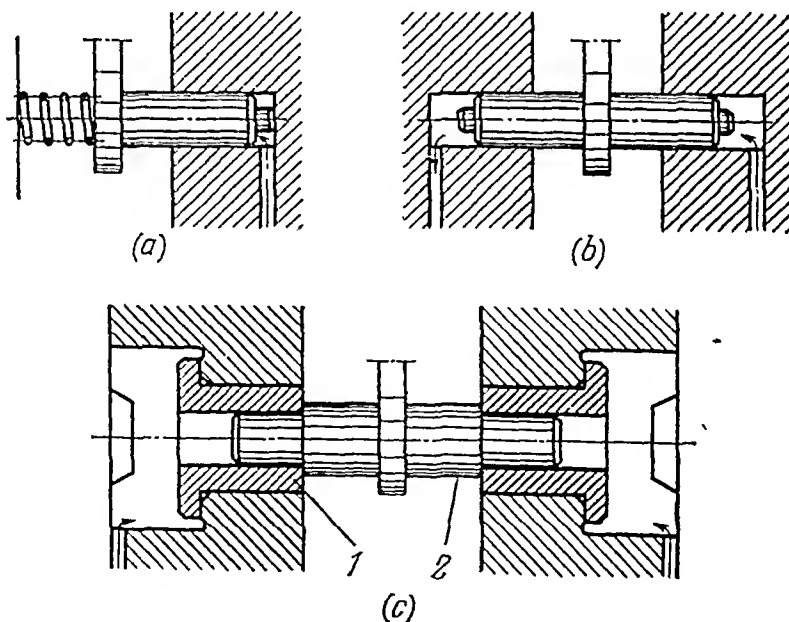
Hydraulic gear-shifting arrangements for speed gearboxes:
